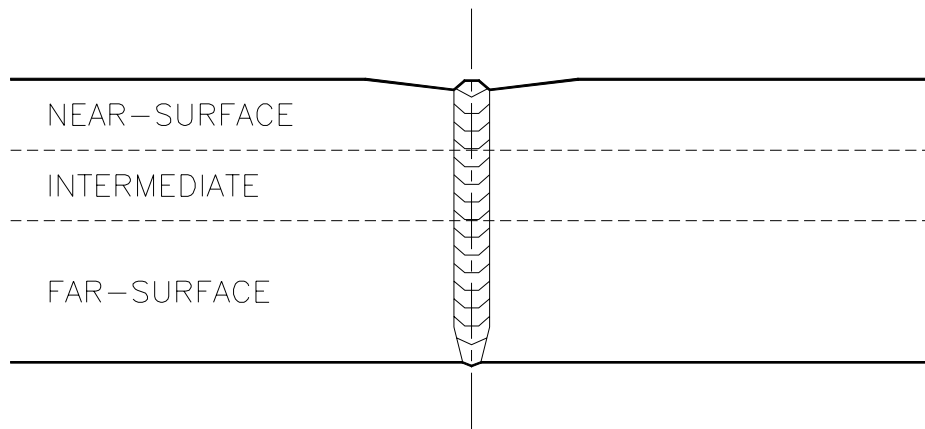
Schematical representation of typical primary piping narrow gap weld.
